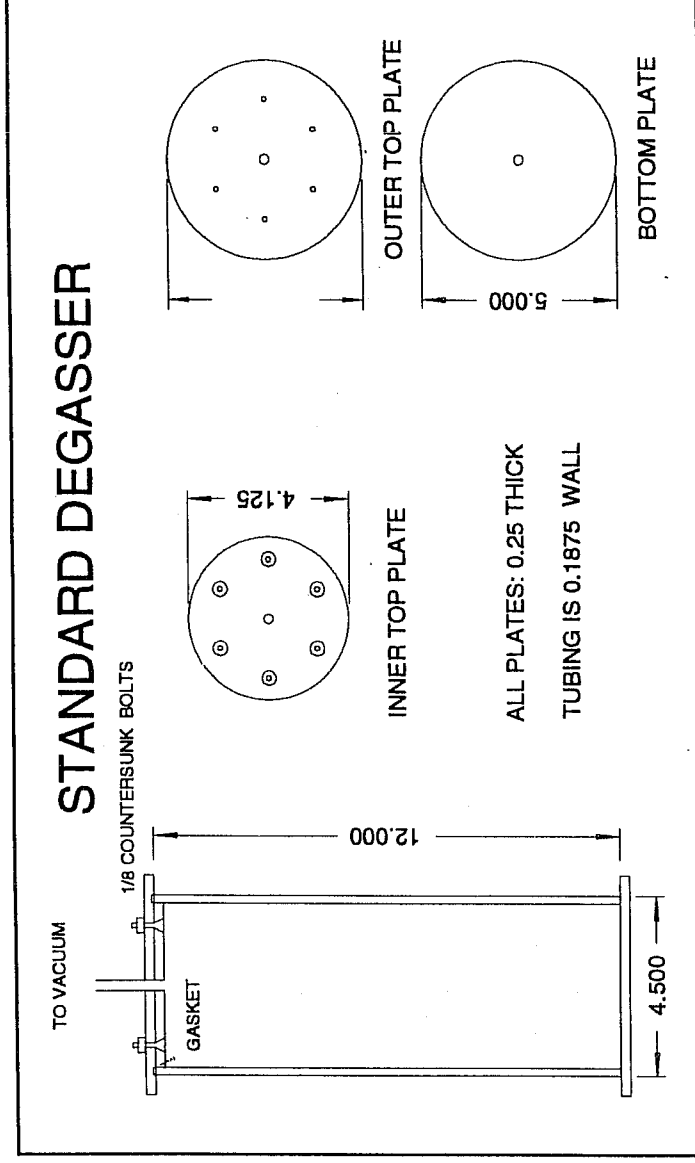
Refer to the equipment chapter for details on construction of the standard size degasser. Note the placement of the six countersunk bolts which hold the inner and outer top plates together. Brass or stainless steel is the best material for the bolts. Note the direction of countersinking the bolts. This ensures easy clean up of the degasser top. Epoxy will not hold the plates together but should be used to hold the bottom plate to the acrylic tubing with a generous fillet. Be sure to ruff the plate and tubing with sandpaper to ensure a good bond.
